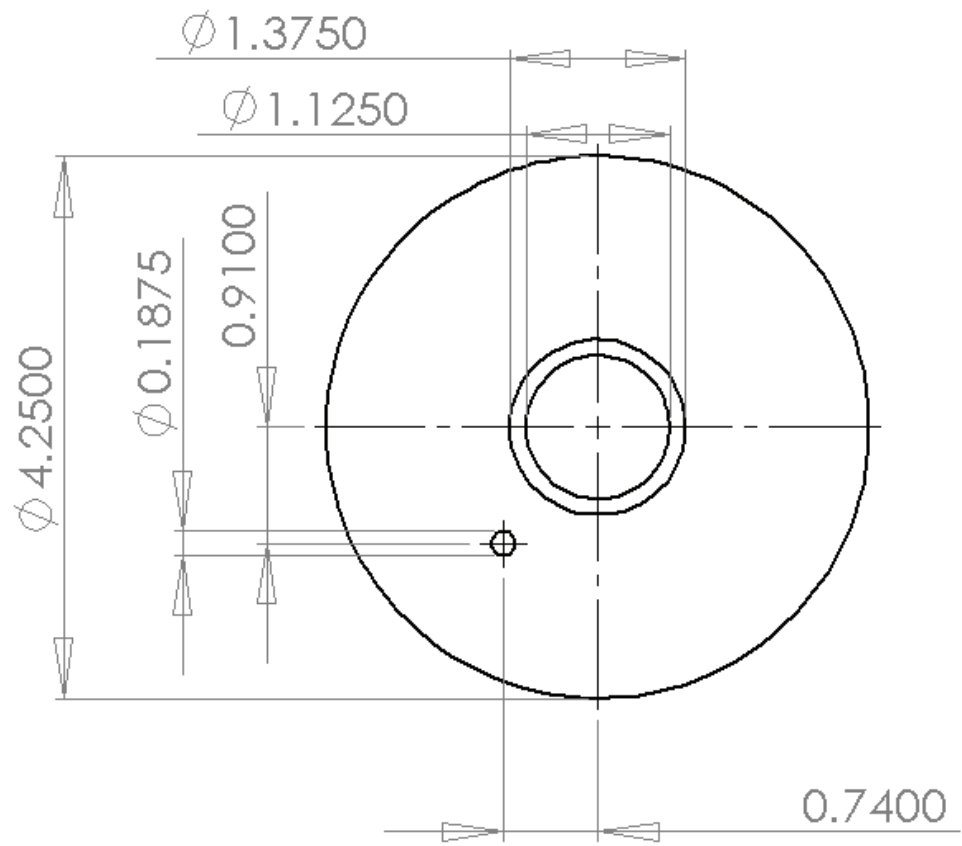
Mechanical drawing of the outside face of the part *right hub.sld
